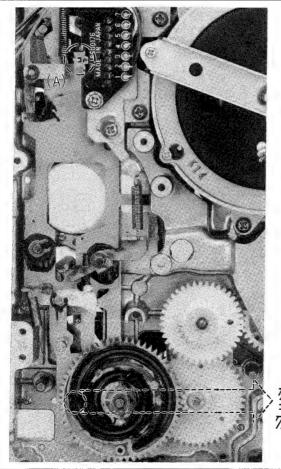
Adjustment of Cam Gear and Mode Select Switch - (4)
